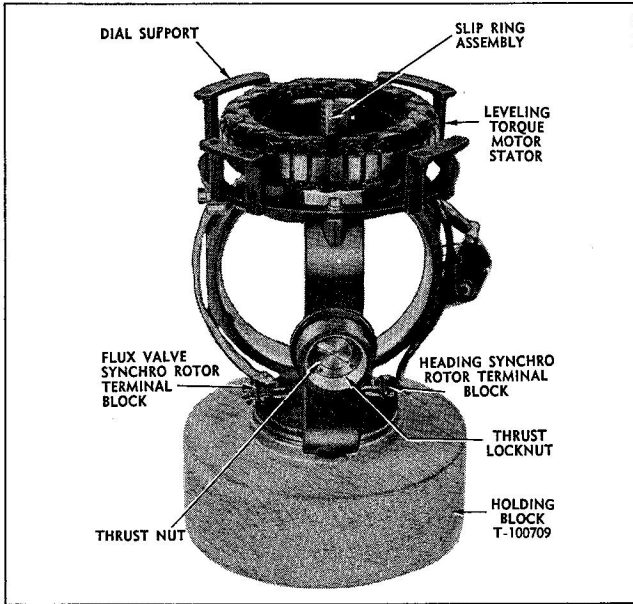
Vertical Ring Assembly in Holding Block T-100709 with Synchro Assembly Down
